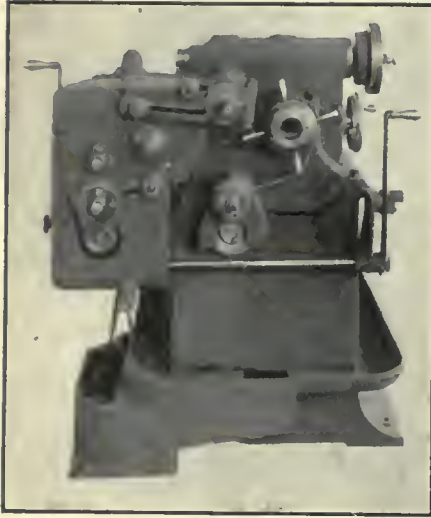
LEES-BRADNER THREAD MILLING MACHINE.
